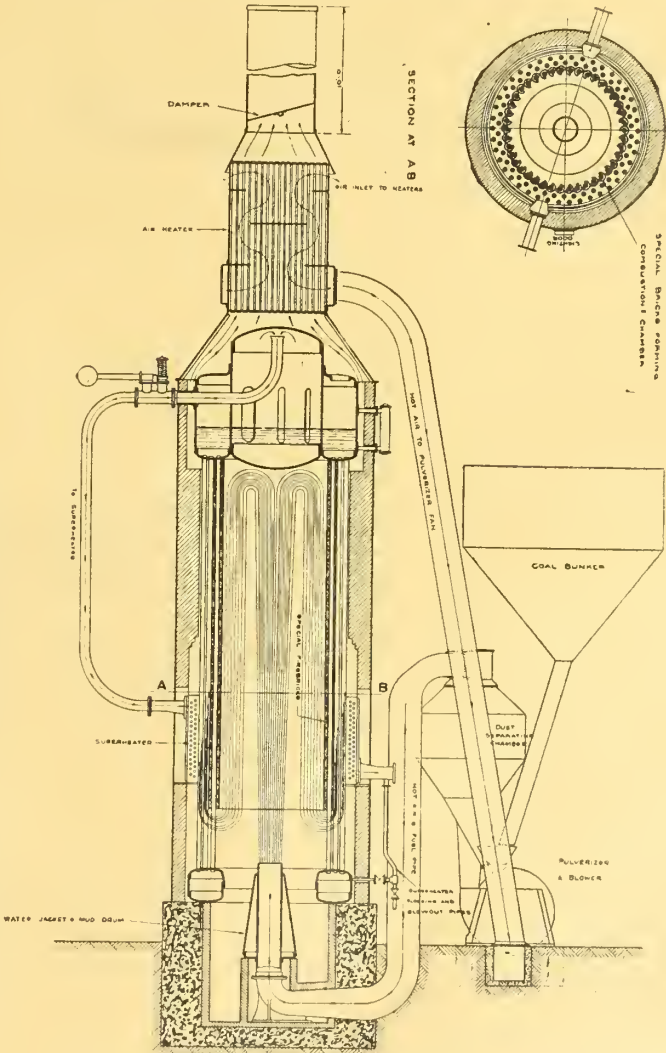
SECTIONAL ELEVATION AND CROSS SECTION OF BETTINGTON BOILER, SHOWING PATH OF GASES.
